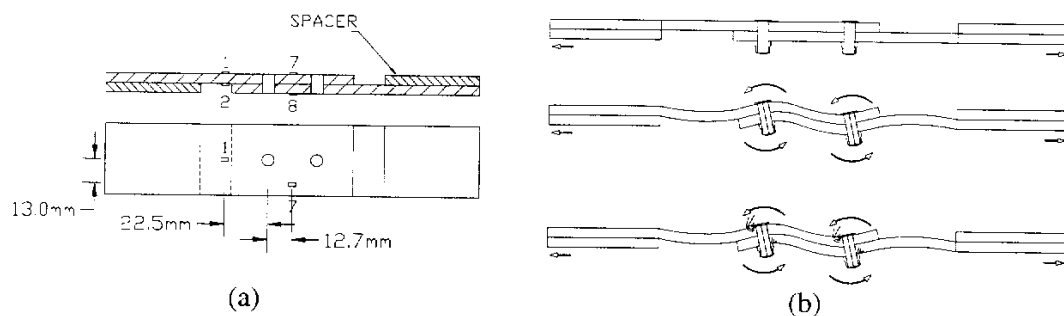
(a) Strain gauge locations on specimen. (b) Deformed shape of two fastener single lap joint specimen due to uniaxial load.
